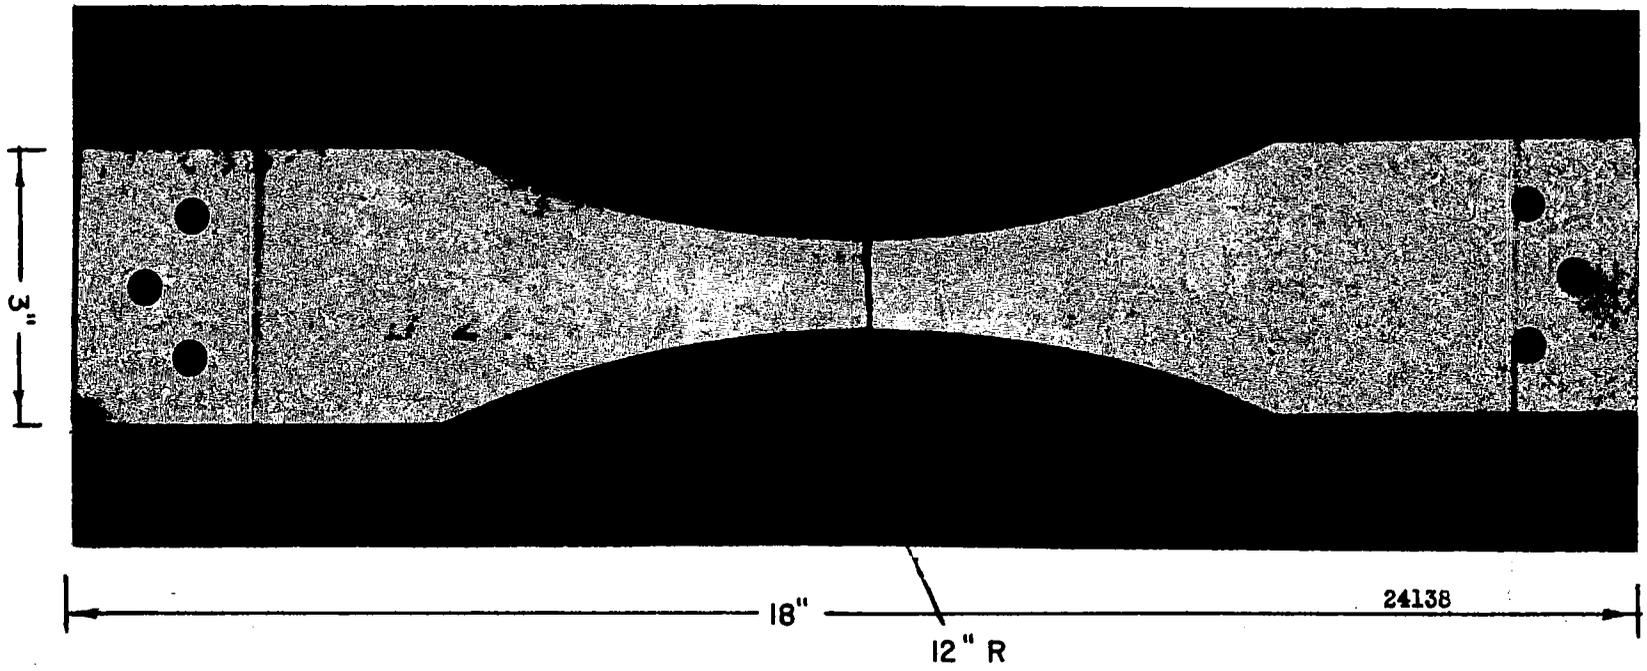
Photograph of a Typical (failed) Test Piece Used in Fatigue Tests.
